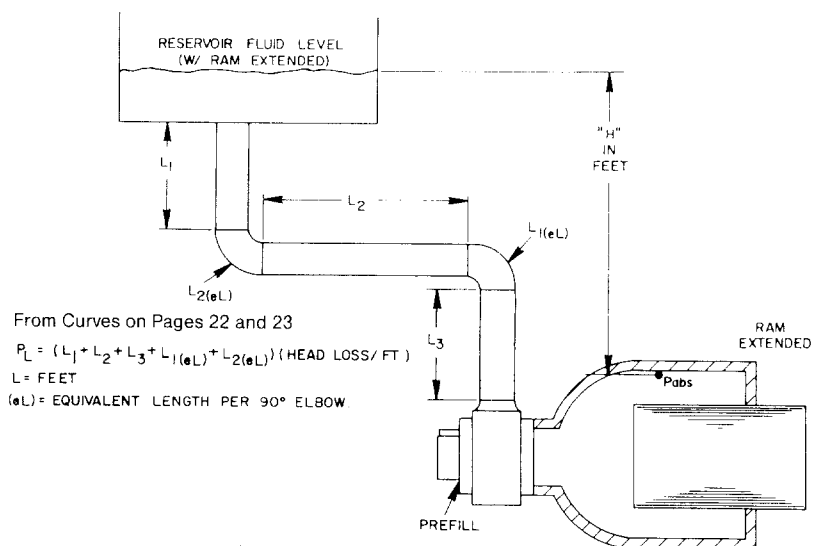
Prefill mounted on cylinder and connected to bottom of reservoir.
